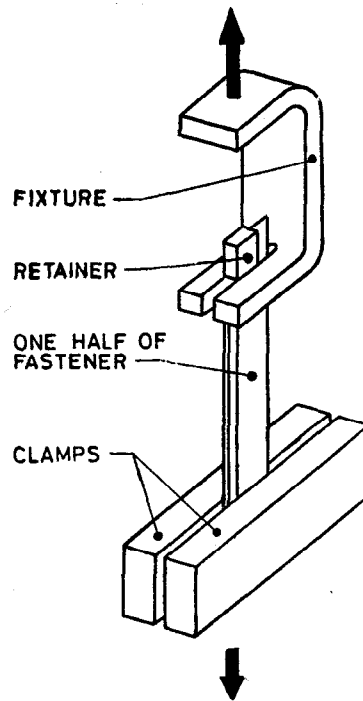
LONGITUDINAL LOAD TEST FOR RETAINING OPEN END FASTENER
